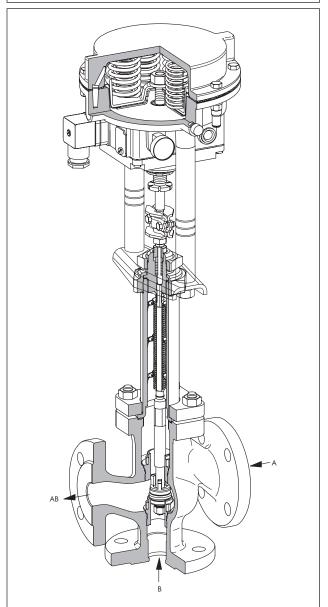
Type 3535-IP Valve (mixing) for Heat Transfer Oil, pneumatic actuator with integrated electropneumatic positioner
